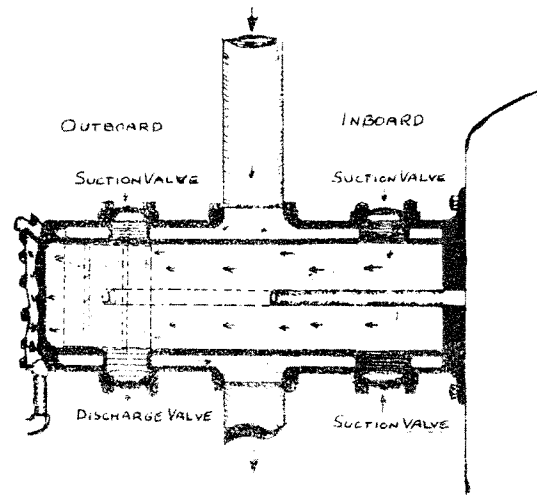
When valve lifter on inboard side of piston was released, pressure built up quickly.
